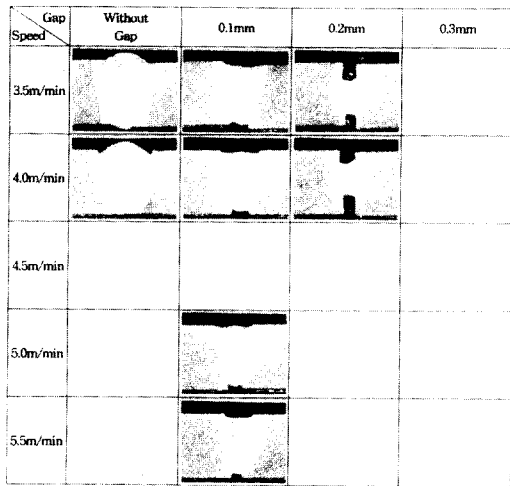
(a) Macrographs of cross-sectioned weld beads with different welding speed in case of 2mm+2mm combination
